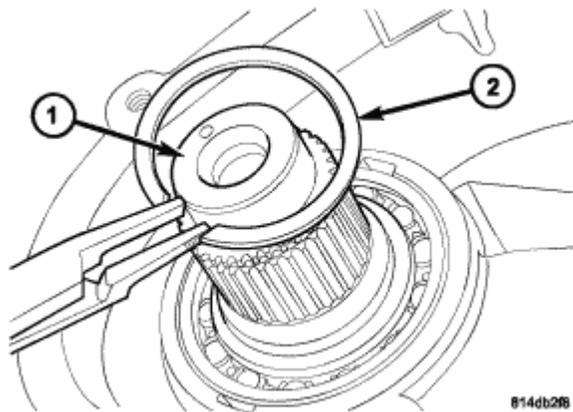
Installing Front Output Shaft Assembly Into Front Case And Front Output Shaft Front Bearing
